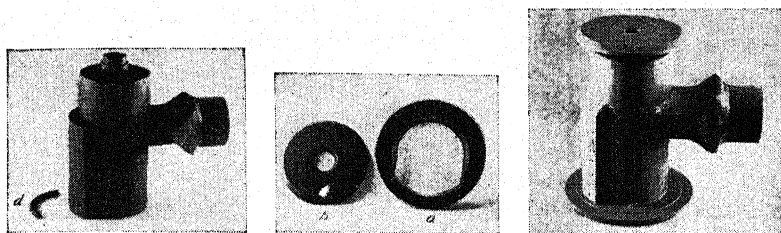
, left, inlet and exhaust ducts welded to cylinder; center, plate forming base of cylinder and connection between cylinder and upper half of crankcase; right, cylinder base and top of water jacket welded in place.
